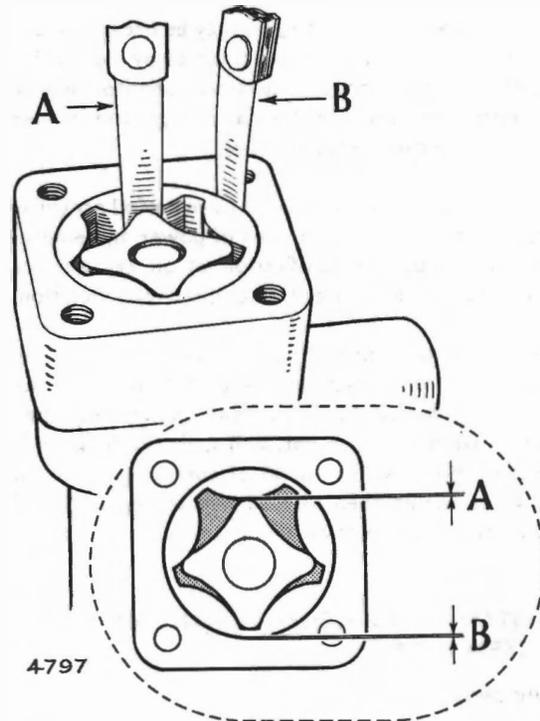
Checking rotor lip and outer rotor clearance in the pump body
